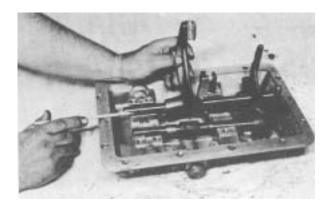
Remove 2nd & 3rd shift fork and rail assembly. CAUTION: Do not loss interlock cross pin.
